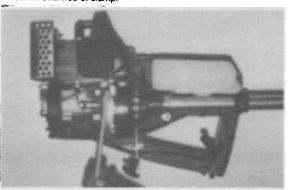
With the left side removed proceed to lift from the housing handle area, the switch and lead assembly, the throttle lever and spring, and the throttle wire housing. Also loosen the fuel line from the retaining groove in the starter housing.
